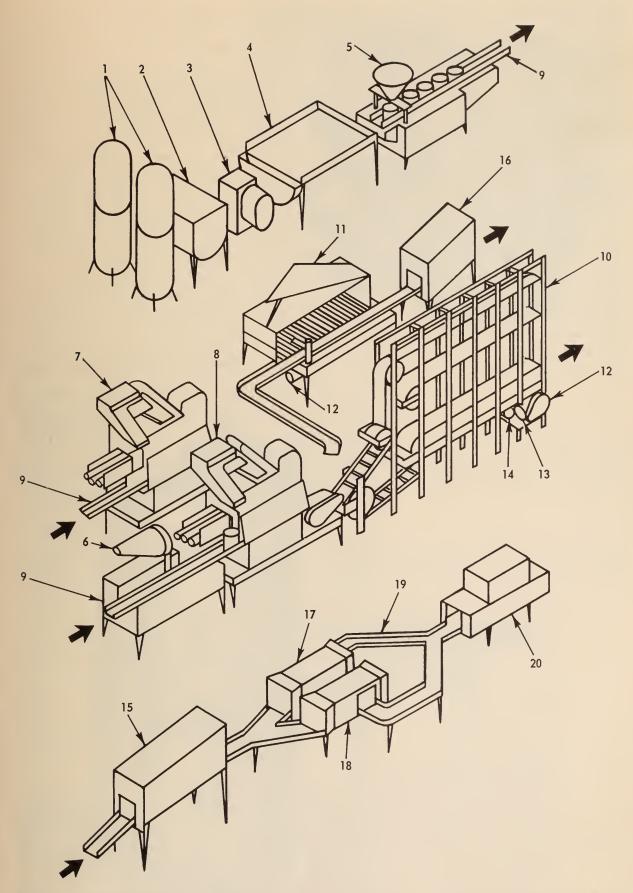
Equipment for an automatic jam line. 1. Vacuum or open kettle. 2. Holding tank. 3. Jam pump. 4. Inspection table. 5. Filler. 6. Glass capper. 7. Two-pound closing machine. 8 Four-pound closing machine. 9. Flat-top chain conveyor. 10. Roll-through cooler. 11. Walking-beam cooler for glass and tin. 12. Cooler recirculating pumps. 13. Blower. 14. Drier. 15. Roll-through labeler for cans. 16. Spot labeler for glass. 17. 2-pound can casing machine. 18. 4-pound can casing machine. 19. Converging conveyor. 20. Case-sealing machine.
